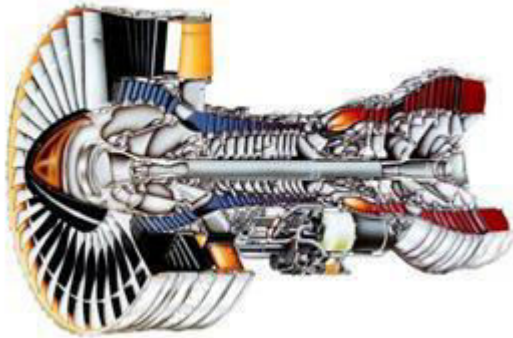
A Typical Cross Section of PW4000-94 Inch Engine
